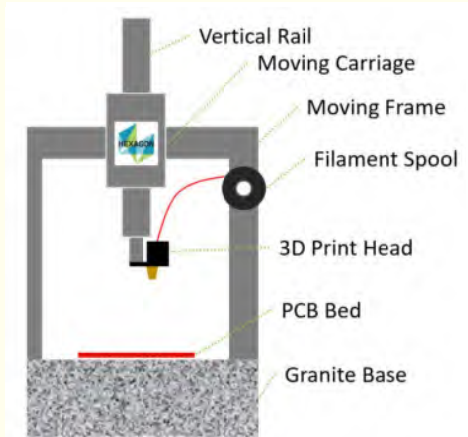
The 3D printer retrofit package installed on a Coordinate Measuring Machine(CMM). The retrofit package will be able to be installed in a simple manner that will still allow full motion of the machine while operating in its 3D print mode.
